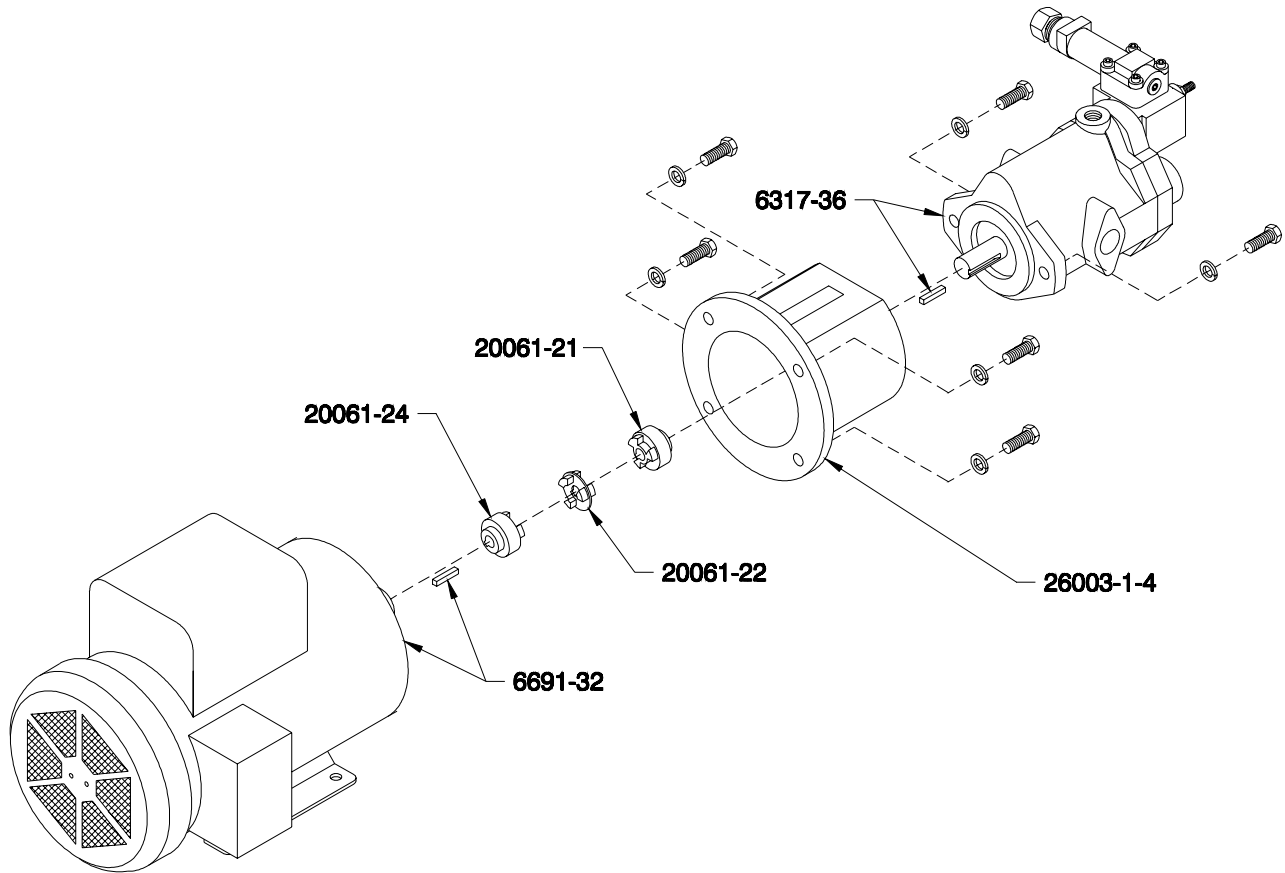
Motor Line Assembly, Single Phase, 220 Volt, (Part No. 18703-1), Exploded View
